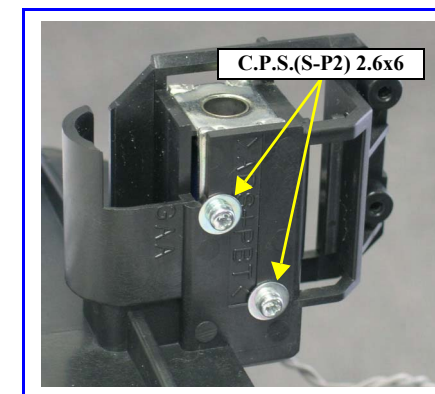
Removing the CUTTER SOLENOID ASSY.
